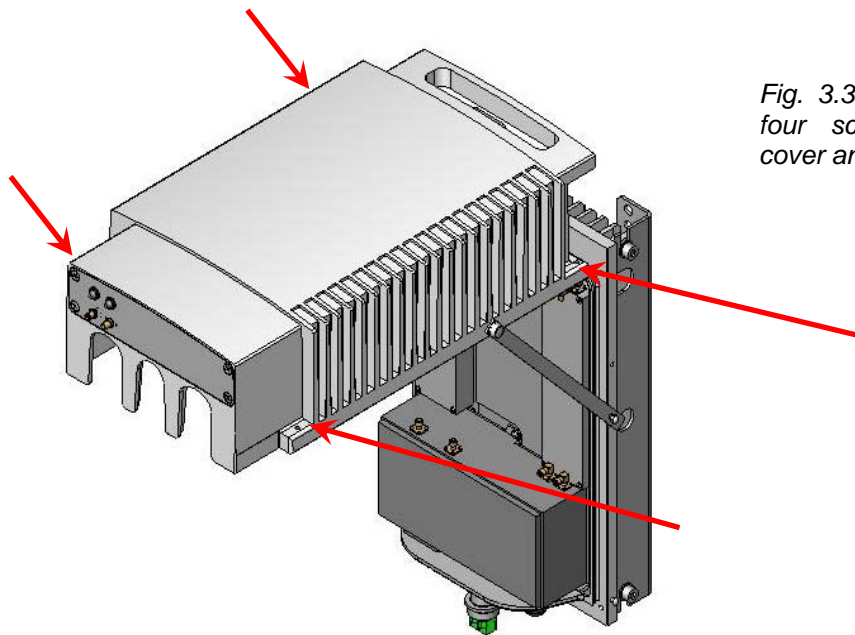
(c) : loose the four screws fixing the cover and open the unit
